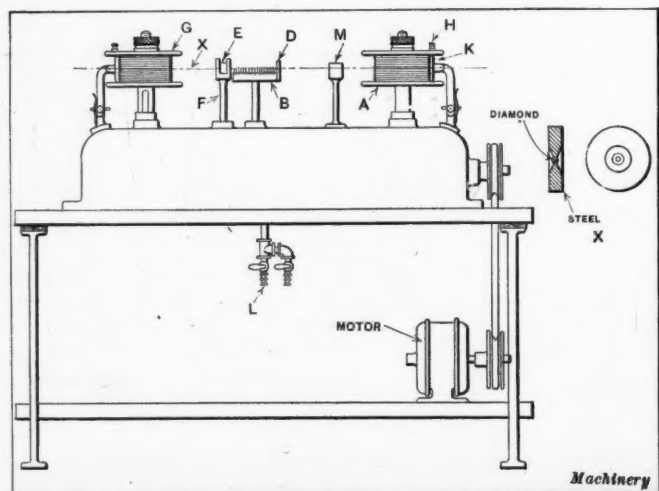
Machine used for drawing Tungsten Wire through Diamond Dies
